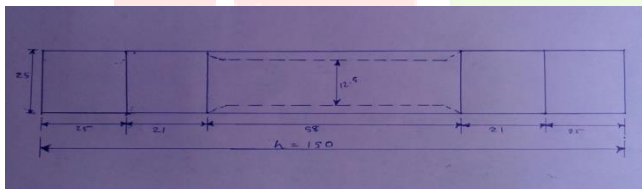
STANDARD SAMPLE WITH ALL DIMENSIONS
